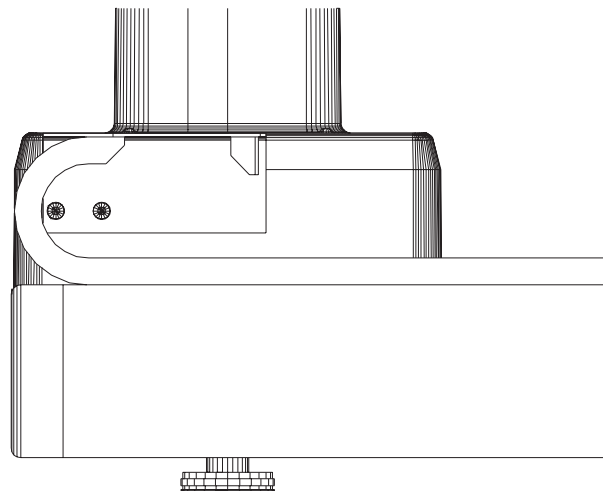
Attaching the Y-axis Cable Track to the Z-Theta Module
